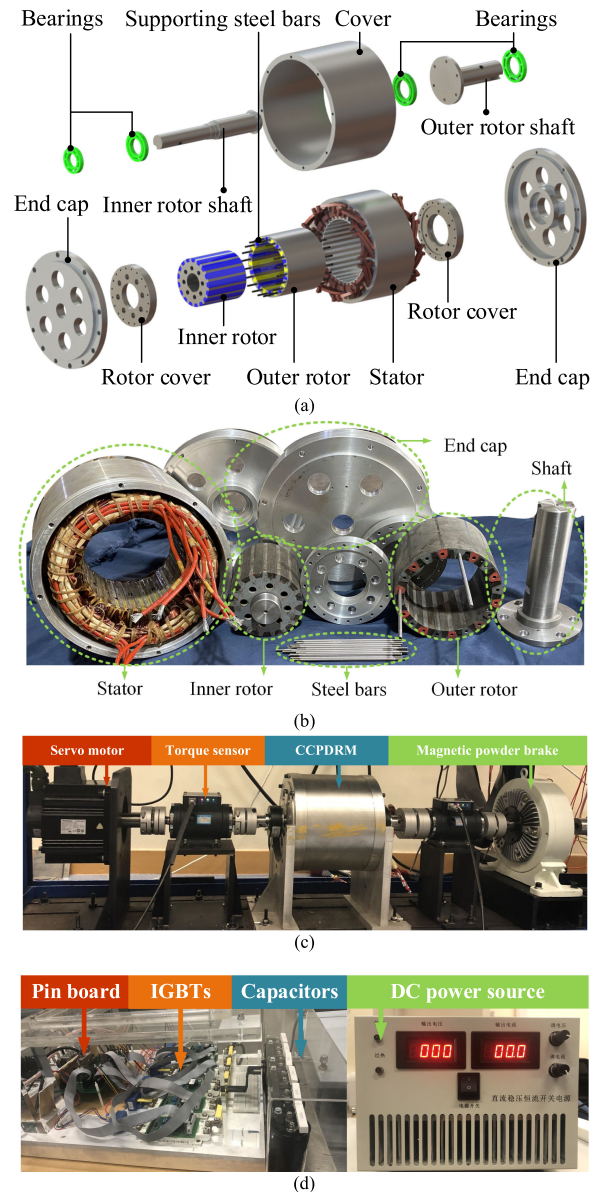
Prototype CCPDRM. (a) Exploded view drawing. (b) Machine components. (c) Test bench. (d) Motor drive hardware.
